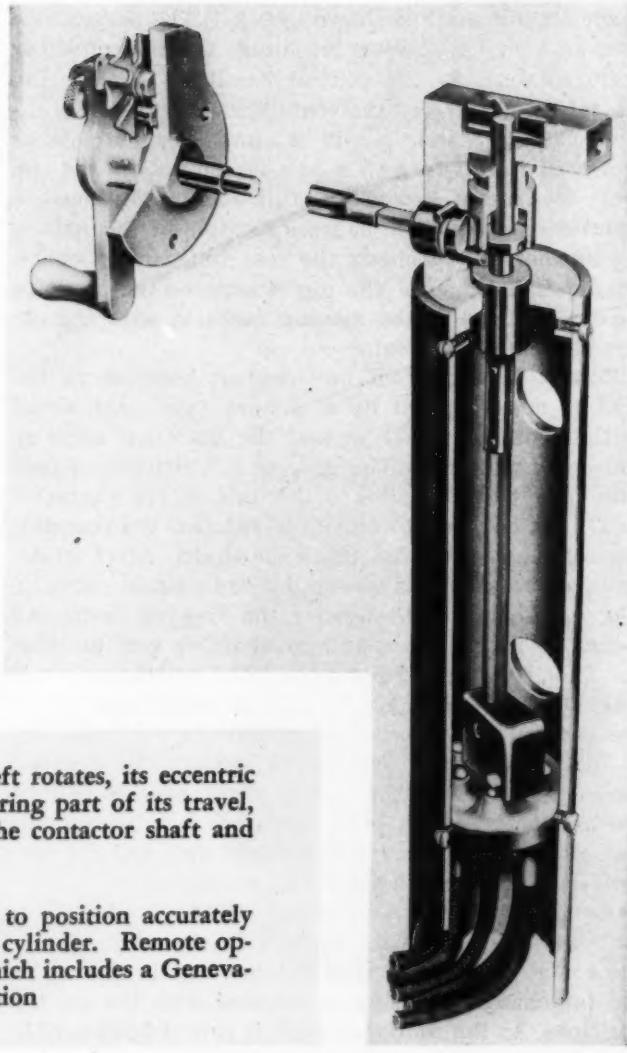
Top—As the horizontal control shaft at the left rotates, its eccentric pin raises and lowers the vertical contactor shaft. During part of its travel, the pin also engages the Geneva type gear keyed to the contactor shaft and turns it to the next position
